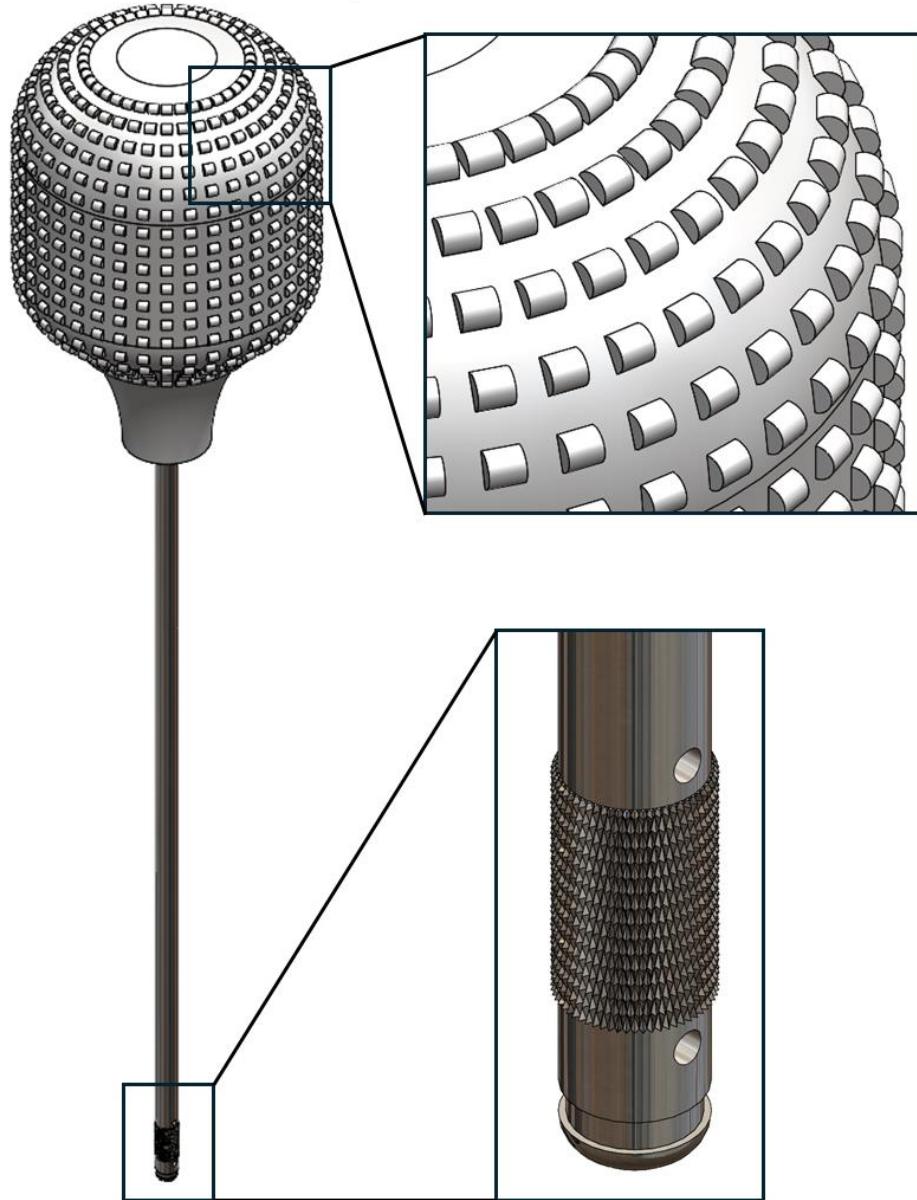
Denervator CAD model, which features the knurled active cutting section, the handle grips, as well as the two parts that make up the Denervator assembly (Denervator Shaft and handle)
